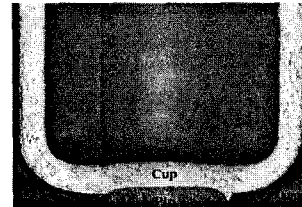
Photograph of the Micro Spot Welded CCFL Electrode.
